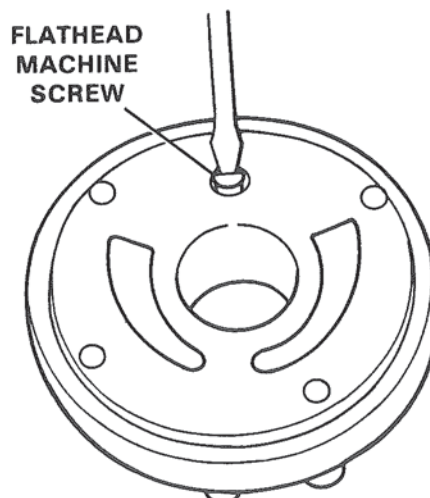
Installing Flat Head Machine Screw through Backing Plate.
